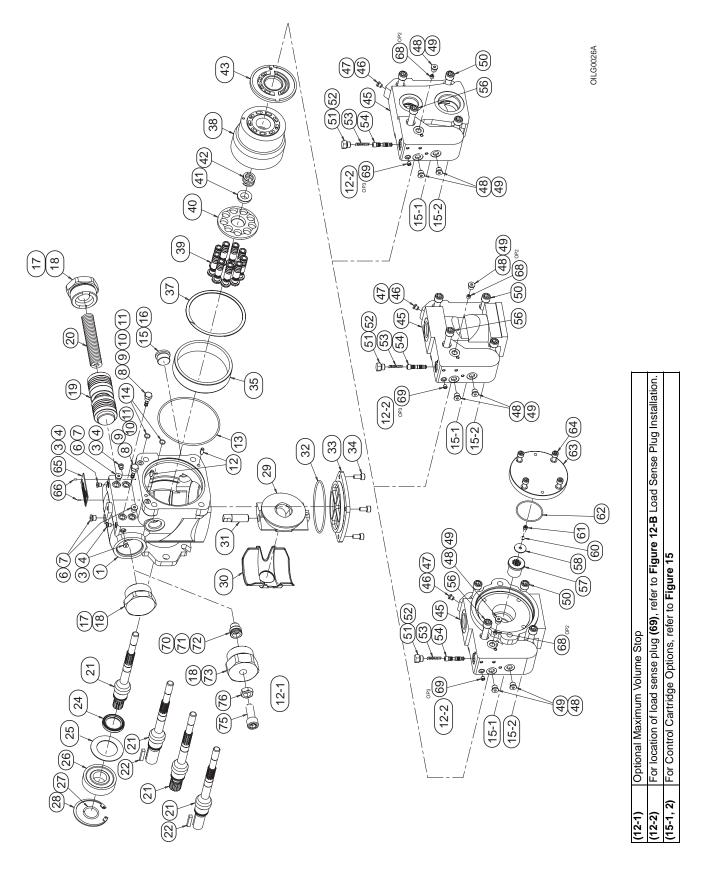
A. Exploded Parts Drawing for PVM-025/-034/-046 B-Frame (519272-201 sheet 1) Right Hand Shown
